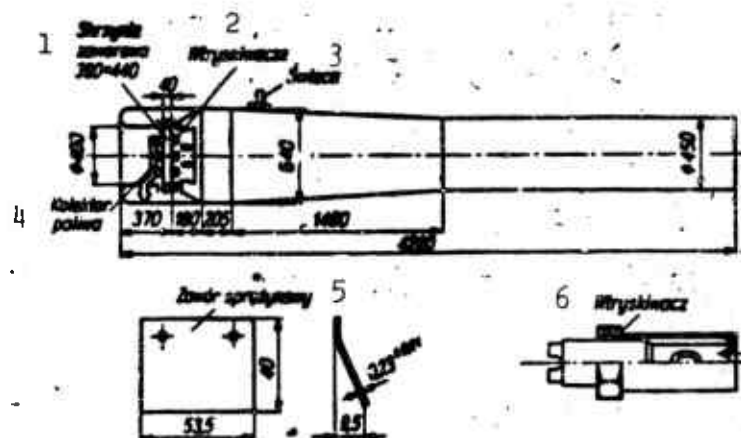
Design diagram of a pulsejet engine with ports. 1) Inlet port manifold; 2) injectors; 3) spark plug; 4) fuel manifold; 5) spring loaded port; 6) injector.
